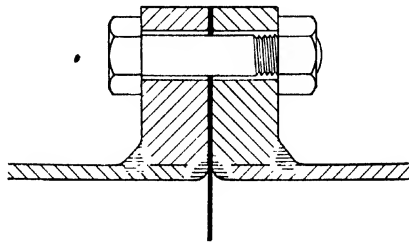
WELDED-ON FLANGE JOINT, TYPE "C"
